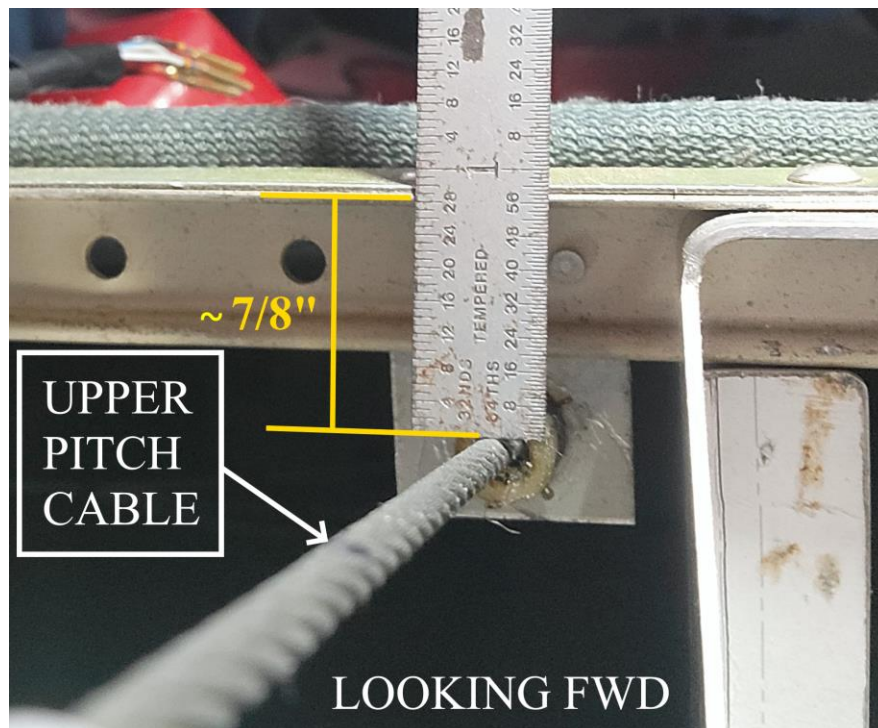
ANGLE TO UPPER PITCH CABLE CLEARANCE
